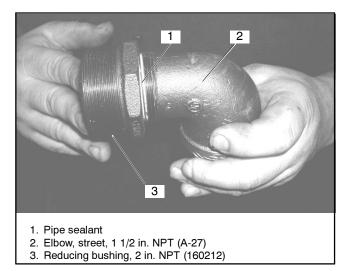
Bushing 160212 and Elbow A-27 Subassembly
